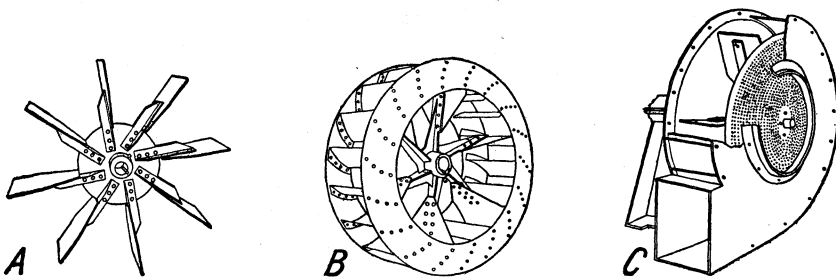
Representative types of gin-fan wheels: A, Plain 8-blade wheel; B, shrouded 18-blade wheel; C, Rembert-type wheel, in the casing.
